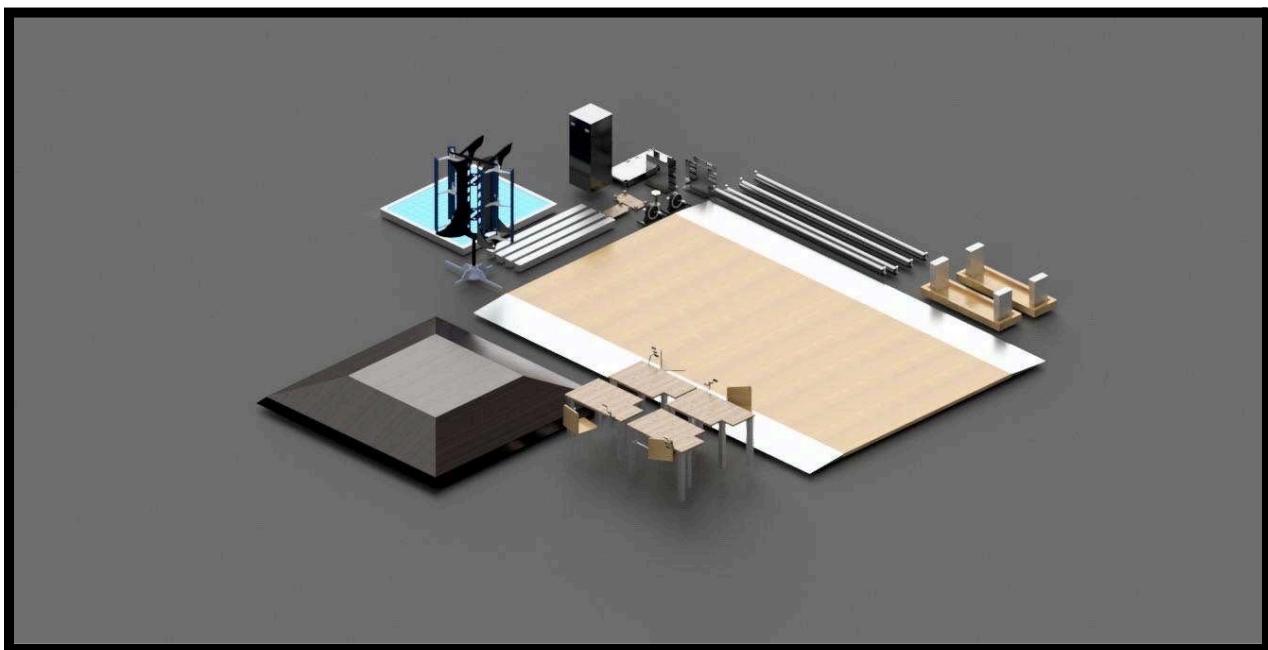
Full Exploded Assembly of the Outdoor Workstation
